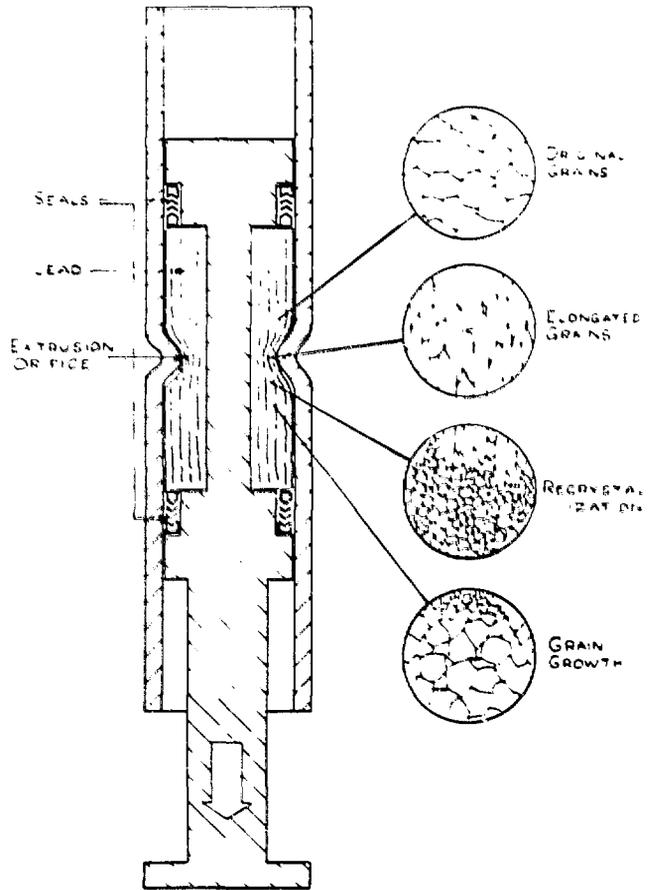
Schematic Cross Section of a Lead-Extrusion Damper
